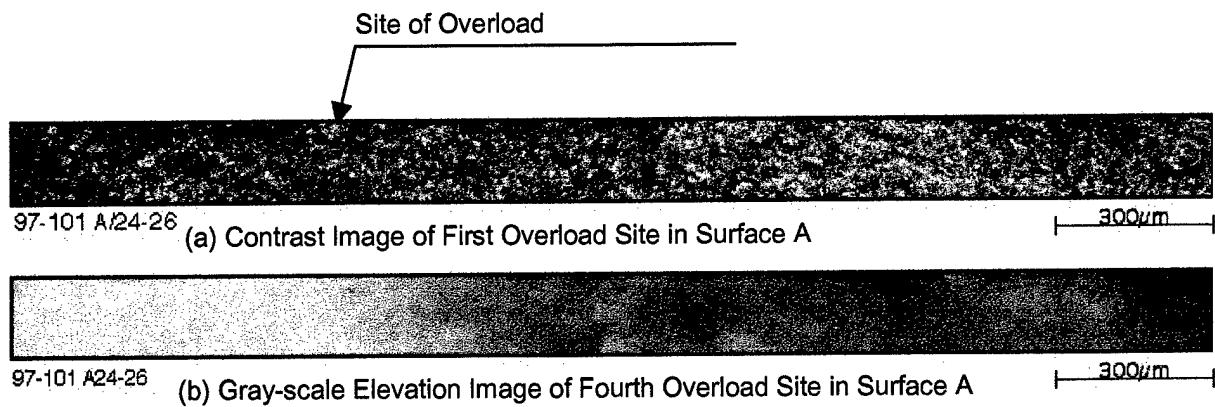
Contrast and gray-scale elevation images of fracture surface area surrounding overload site.
